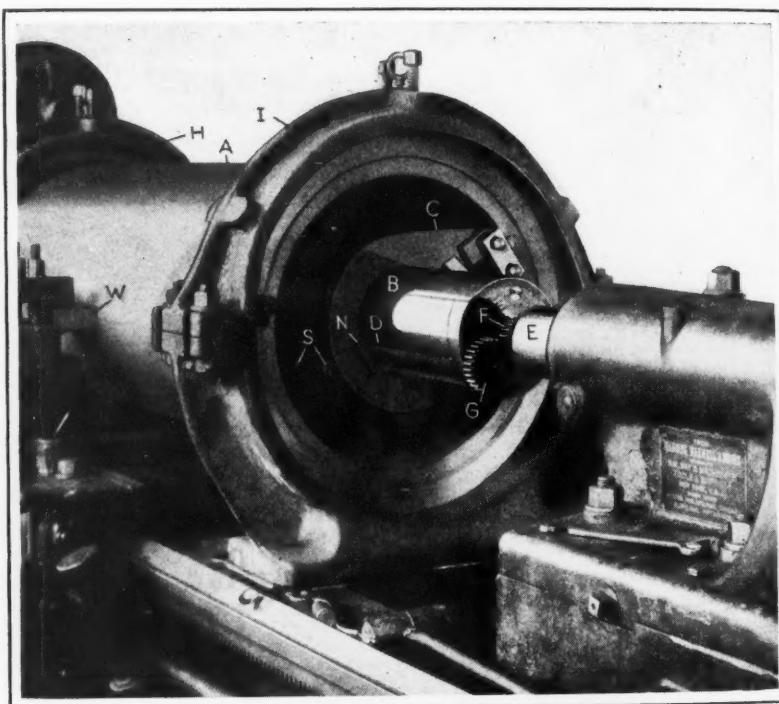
Geared-head Lathe Equipped for Taper-boring Large Cast-iron Cylinders
